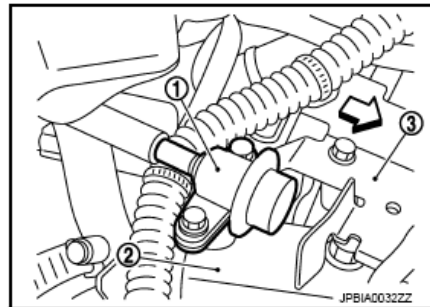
Locating Fuel Feed Hose, Fuel Sub-Tube And Harness Bracket
